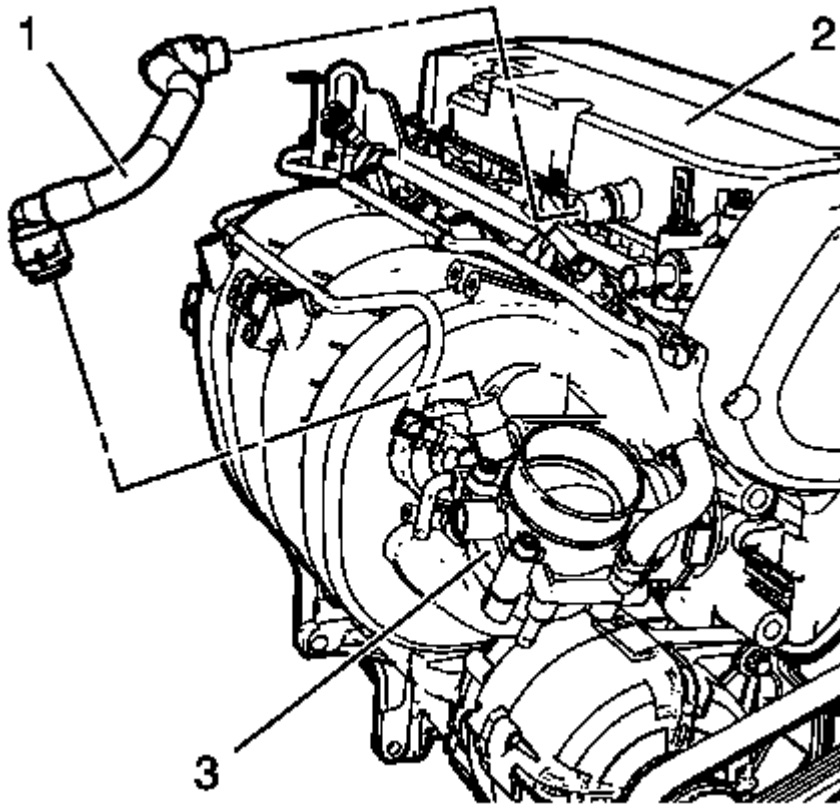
Throttle Body And Positive Crankcase Ventilation Tube
